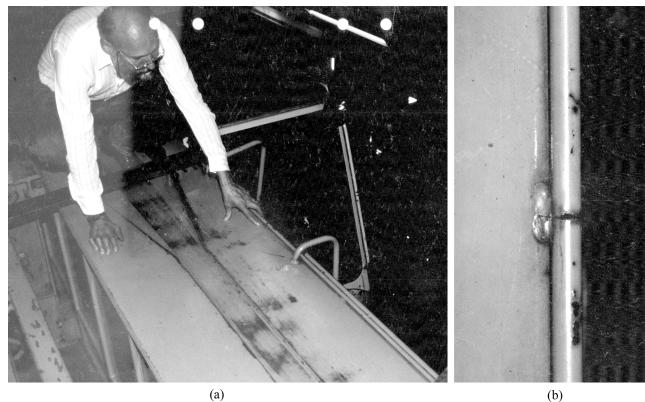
Inspection of a mobile crane (a) and crack in the weld joint (b)
